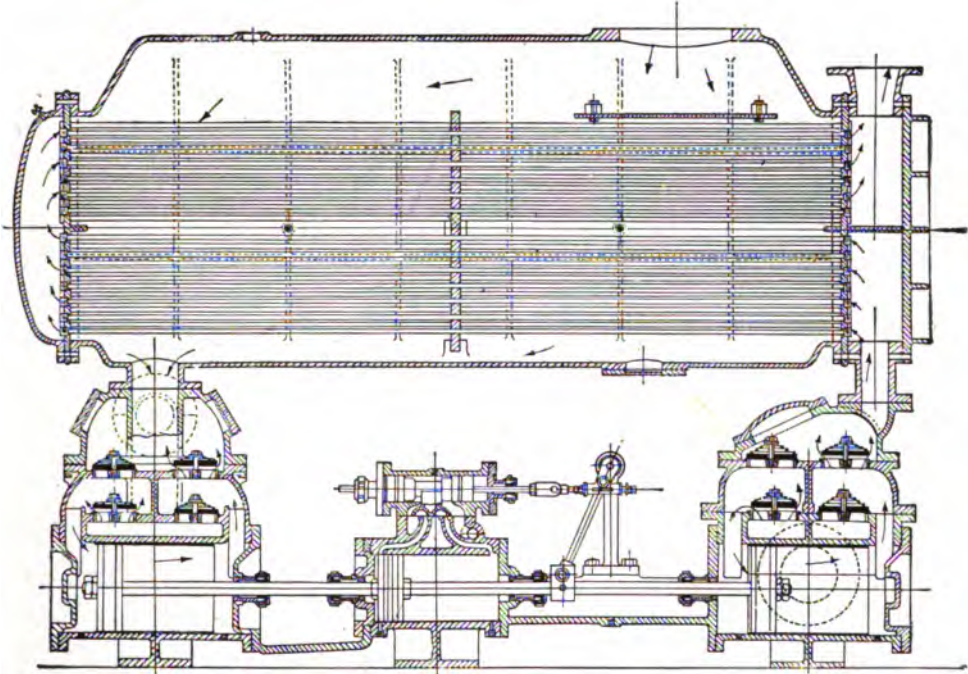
Surface Condenser Mounted on Combined Air and Circulating Pump of the Wheeler Condenser and Engineering Co.
